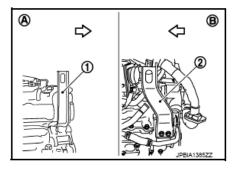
Identifying Engine Front And Rear Slingers Courtesy of NISSAN MOTOR CO., U.S.A.
